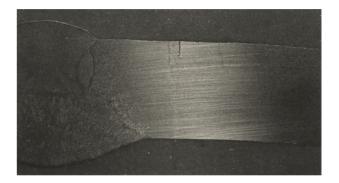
Alkaline Stress Corrosion Cracking in the Vicinity of a Weld
